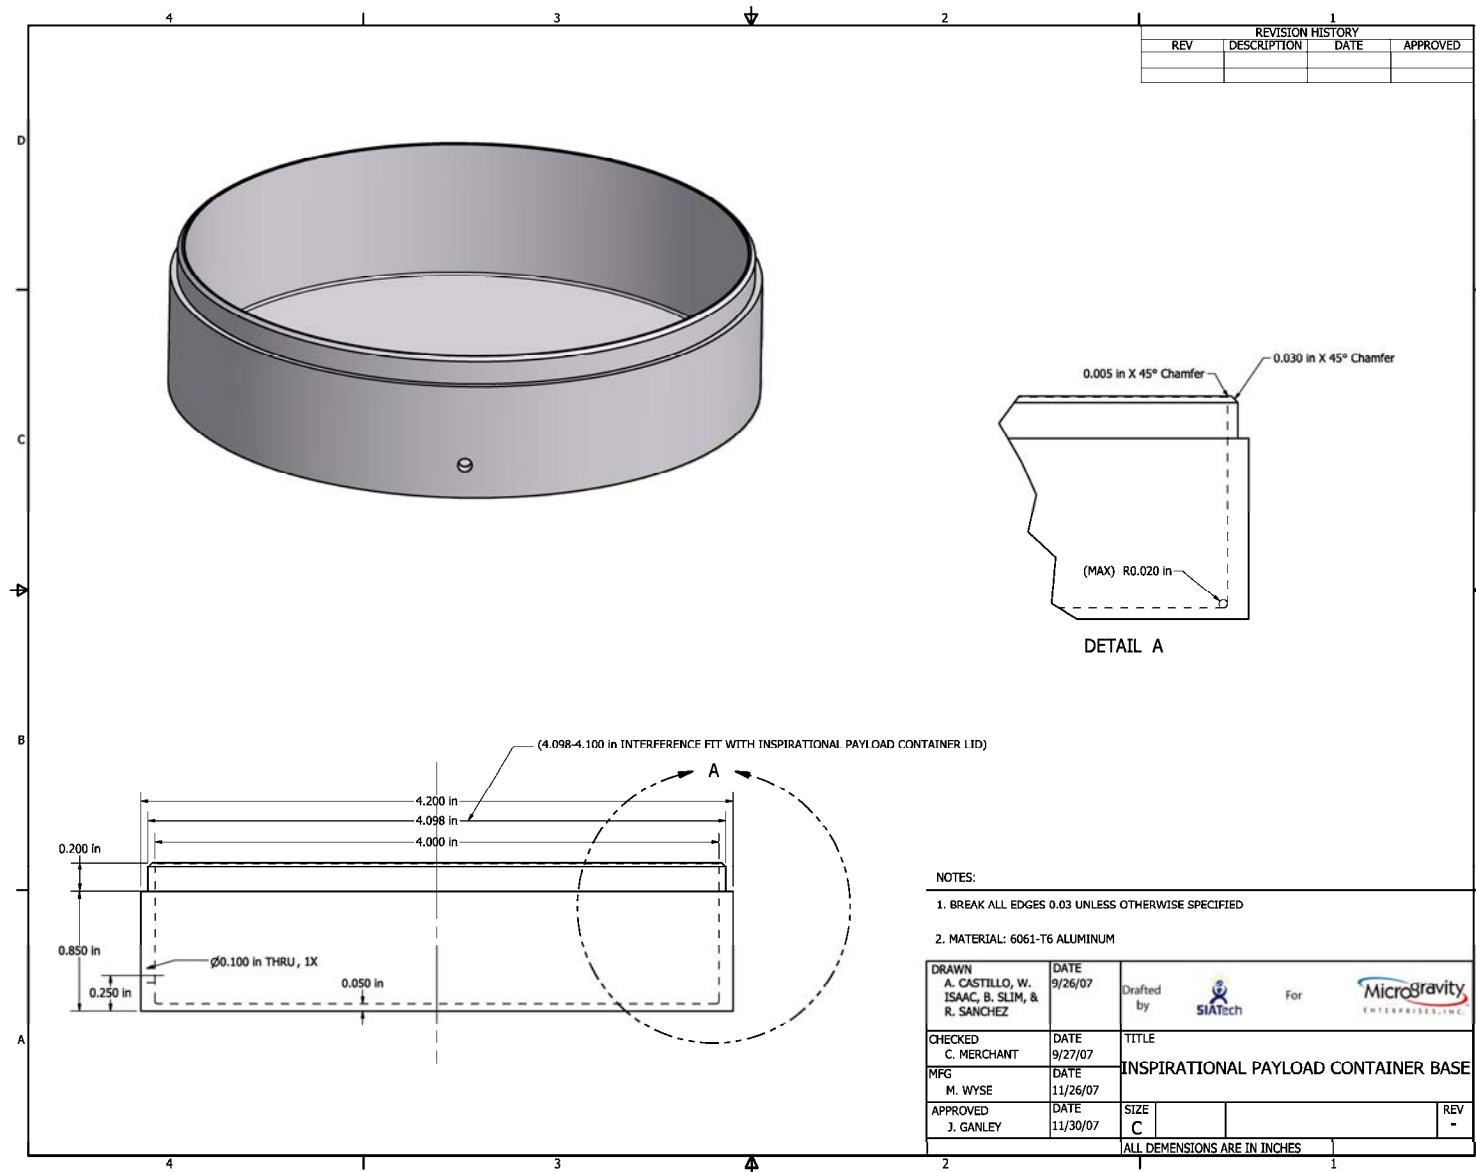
Recommended Inspirational Payload Container Base Drawing
